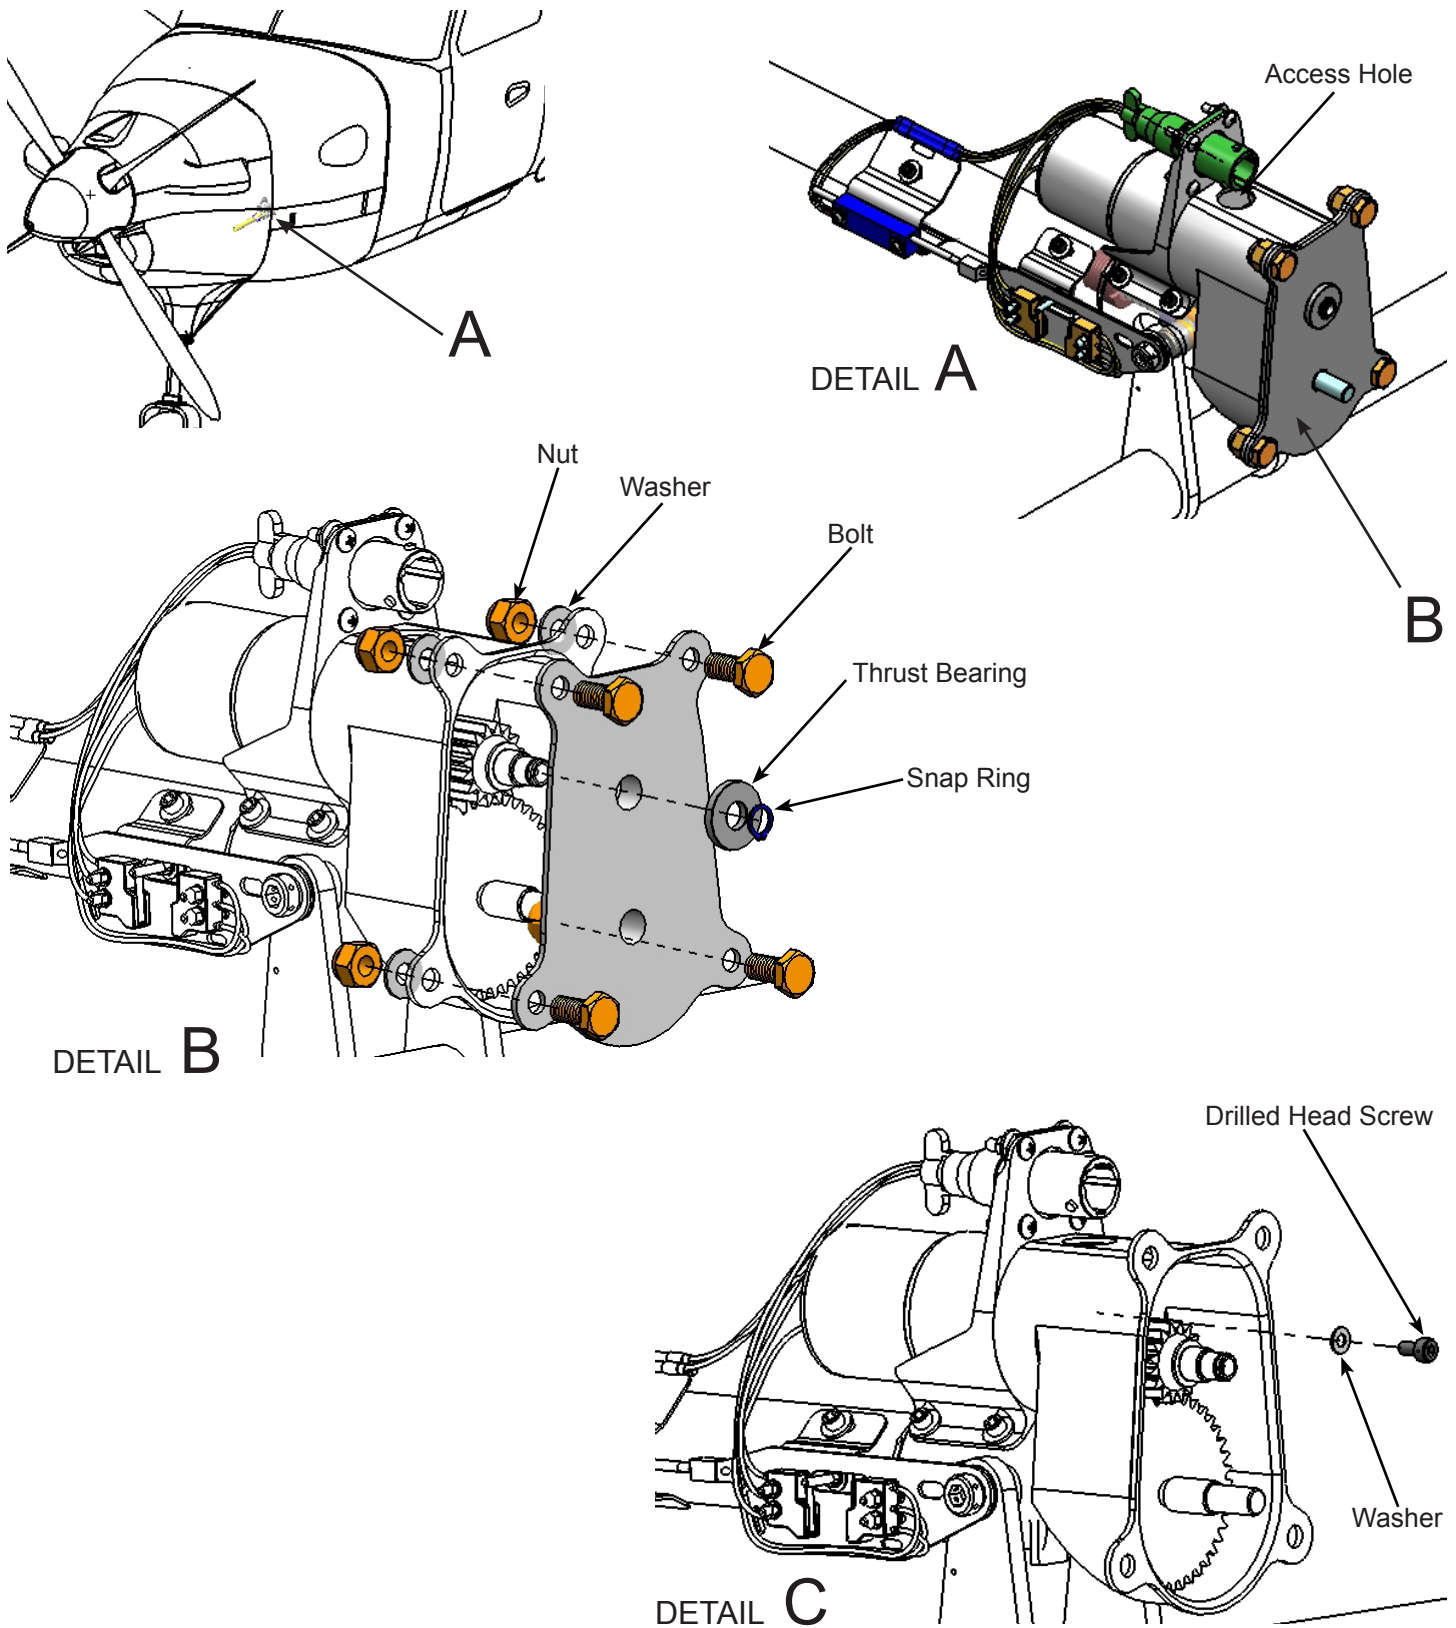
Rudder Trim Motor Inspection and Drilled Head Screw Replacement
